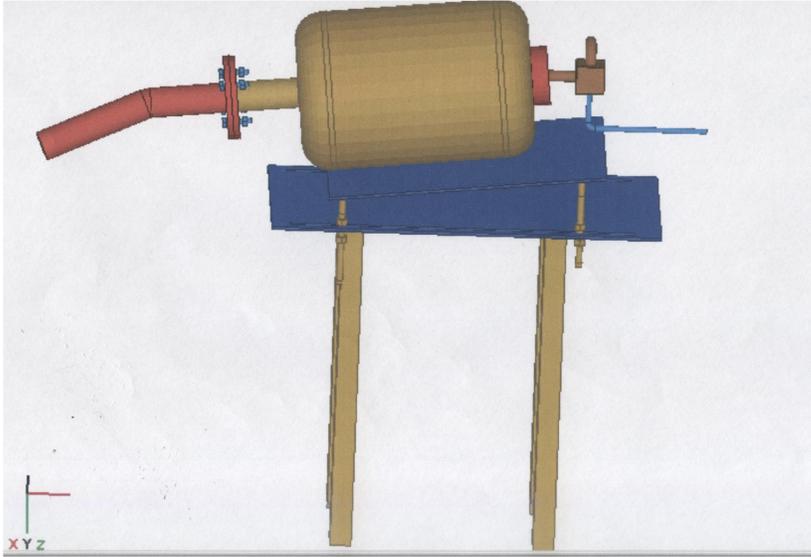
Air Cannon Drawing with Pipe – Type Nozzle Application
